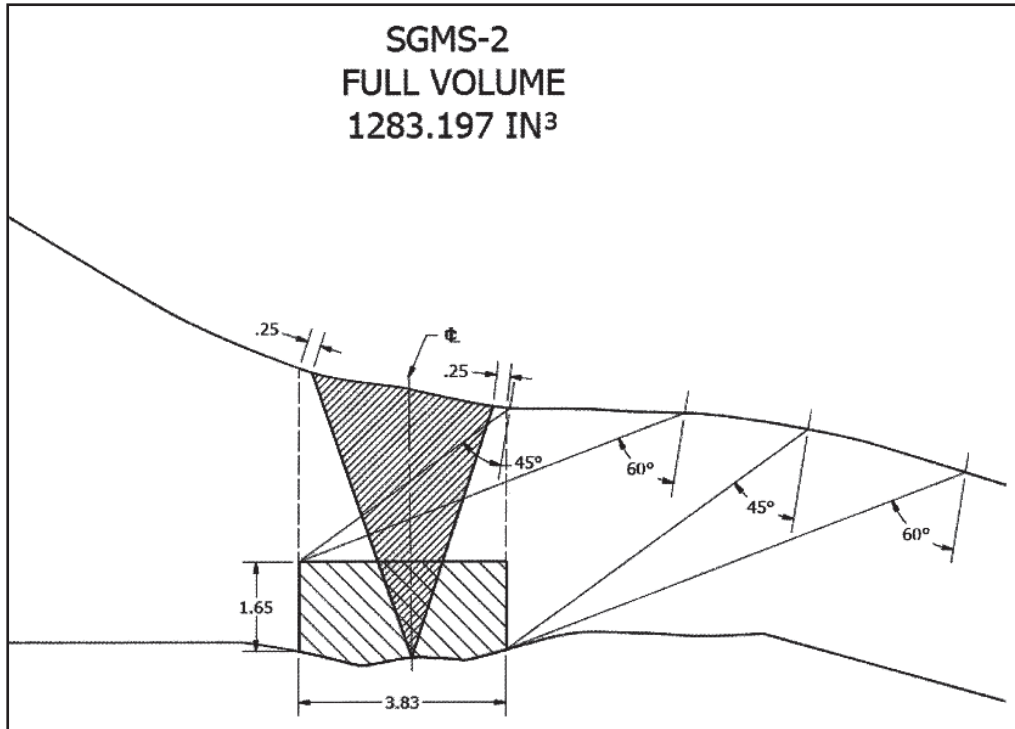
Weld SGMS-2, 45° & 60° Shell Side Axial Scans
